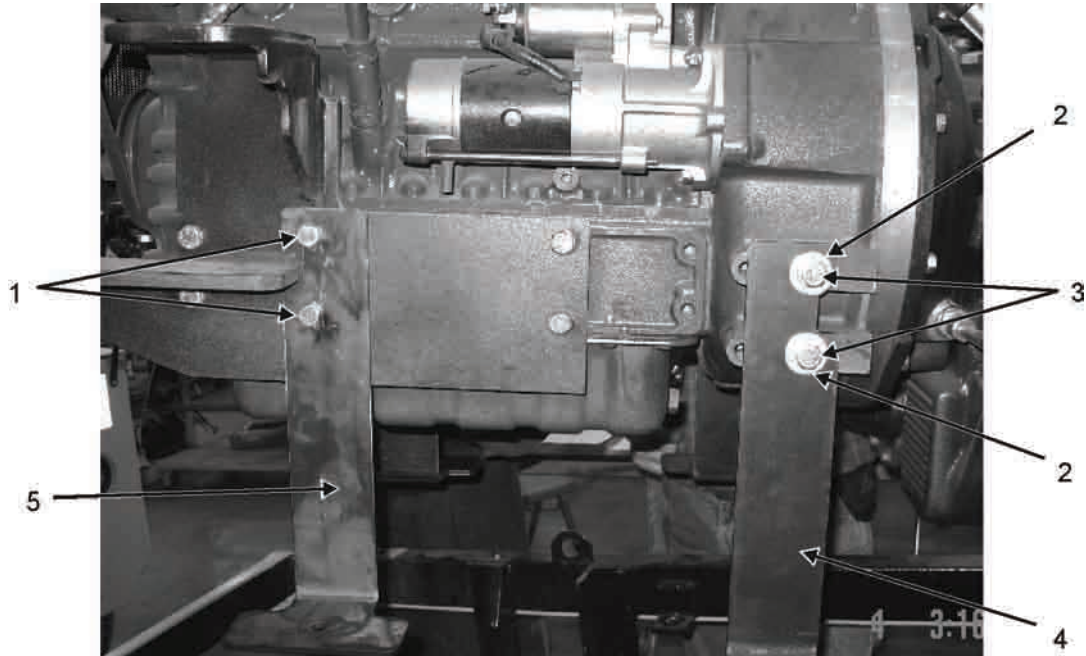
Engine Power Pack Maintenance Mounts, LH (Removal and Installation)
